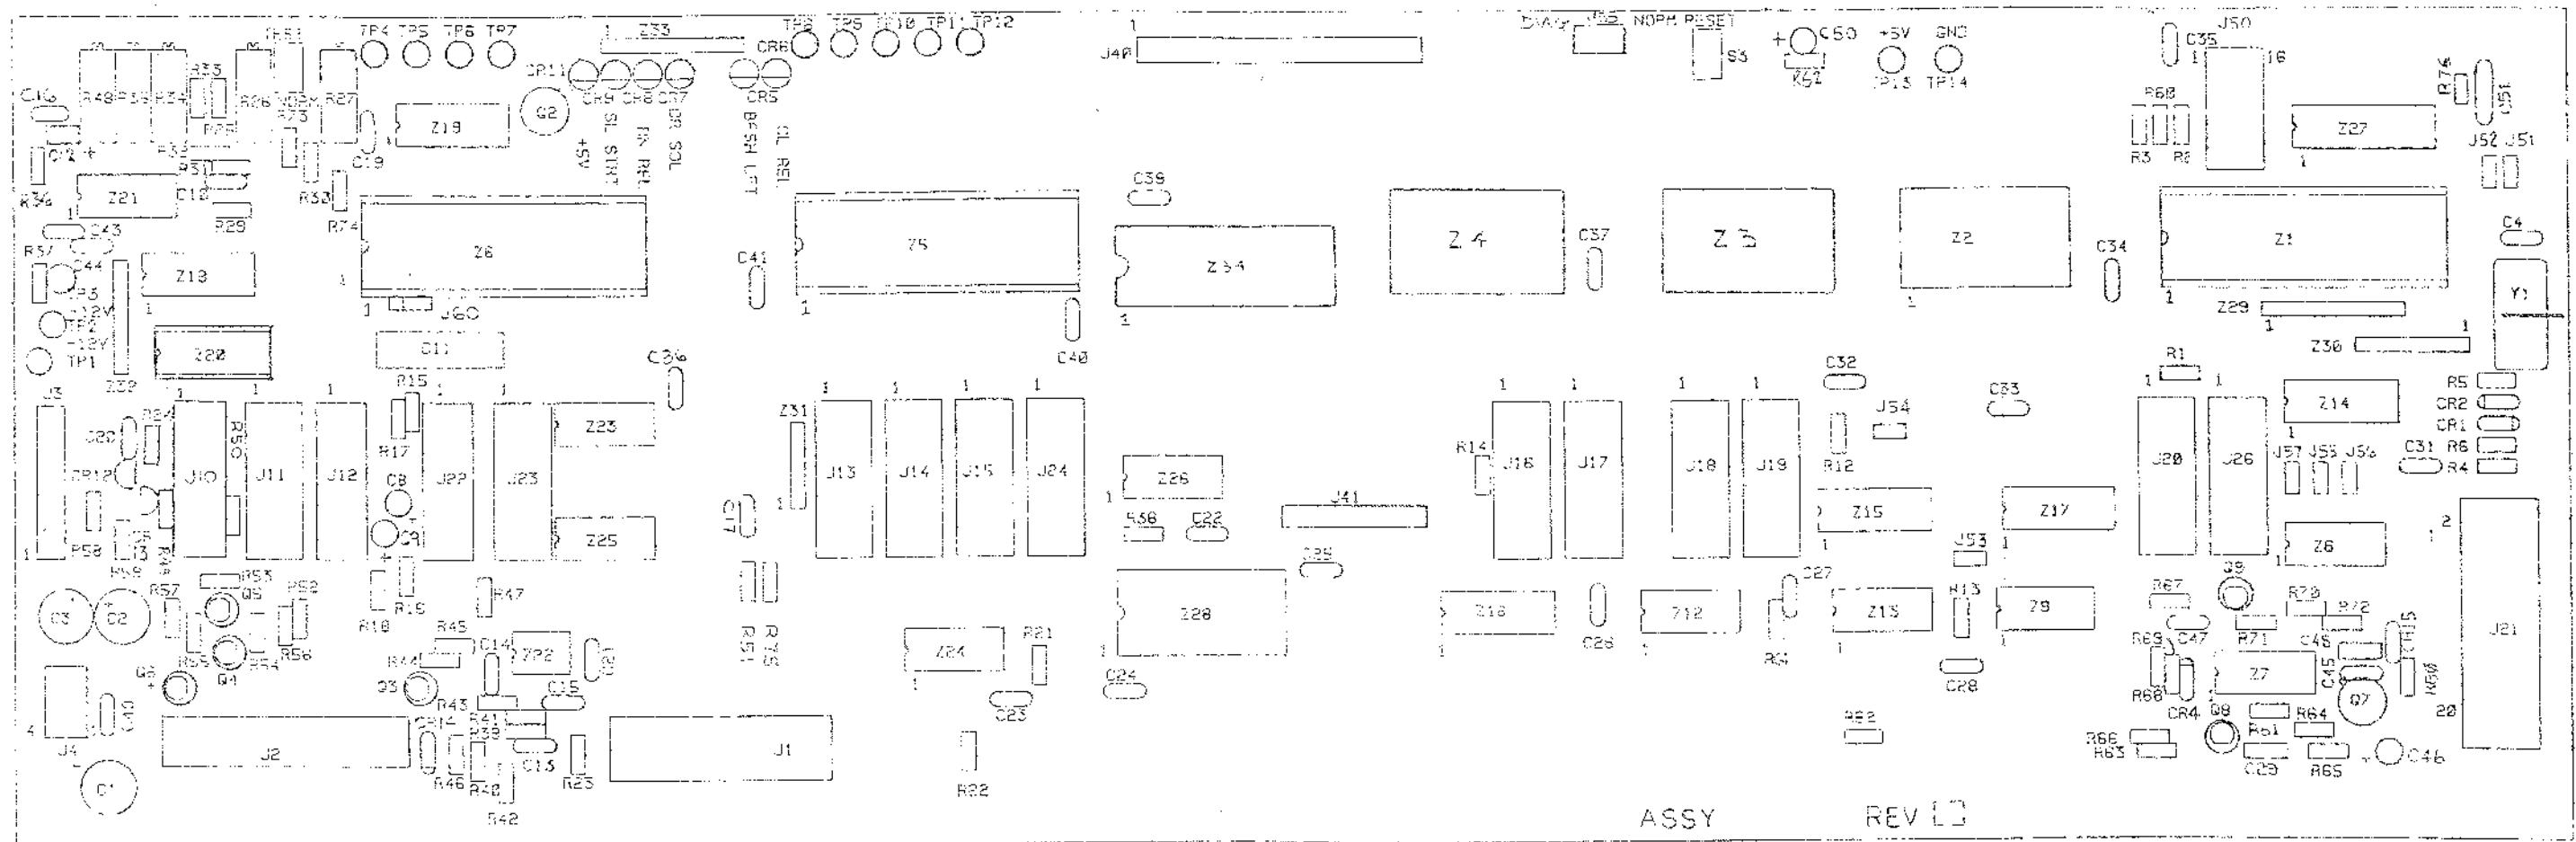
Component Location: Microcomputer Printed Circuit Board, PN 74542-0
